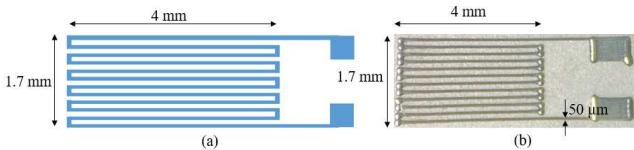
Strain gauge design (a) and Printed strain gauge with dimensions (b)
